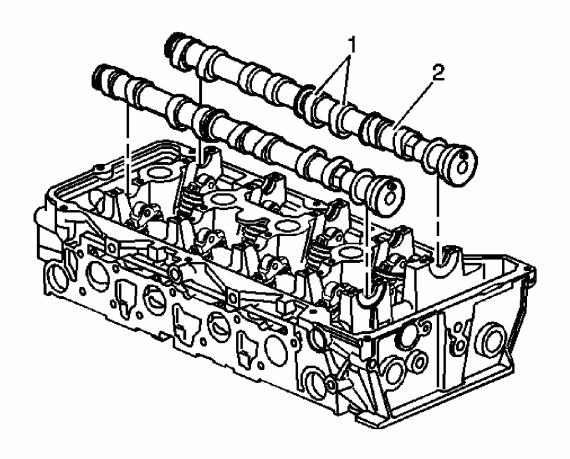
Identifying Camshaft Lobes & Journals Courtesy of GENERAL MOTORS CORP.
